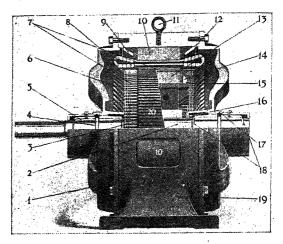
Sectional View Showing Principal Parts of Alternating-Current Motor Courtesy of Reliance Electric and Engineering Company, Cleveland, Ohio
